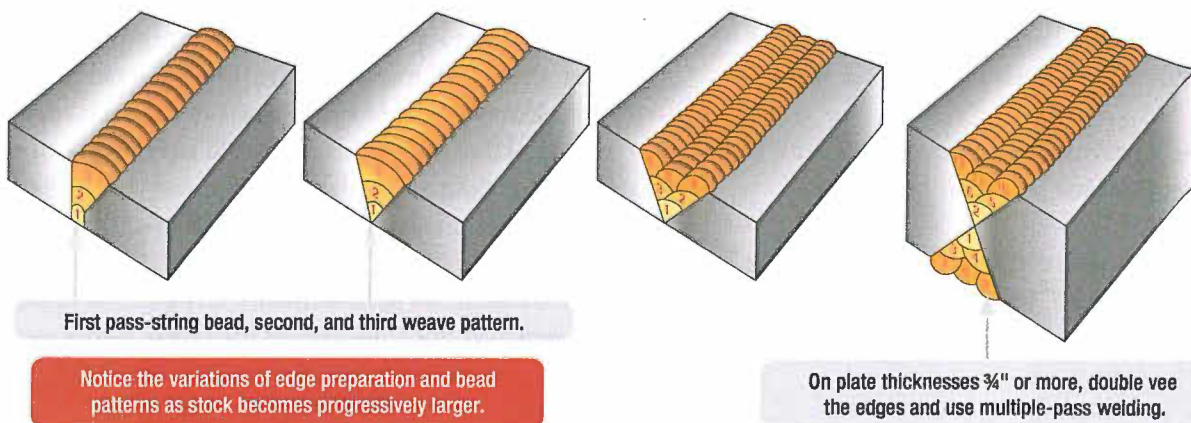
Multiple-pass groove welding of butt joints.
